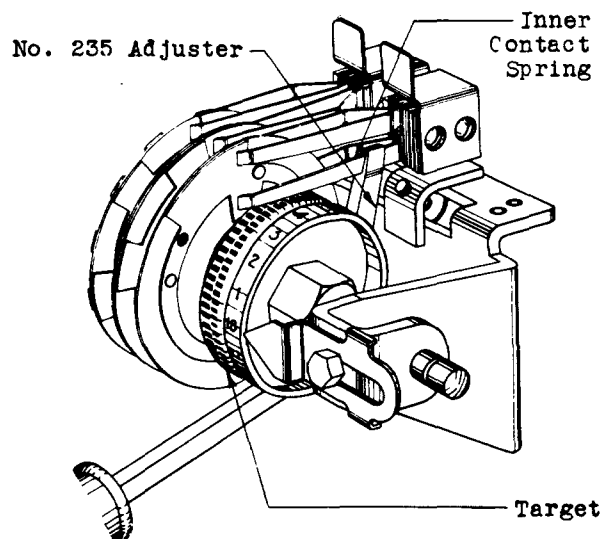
Method of Using the No. 235 Adjuster in Adjusting Inner Contact Springs
